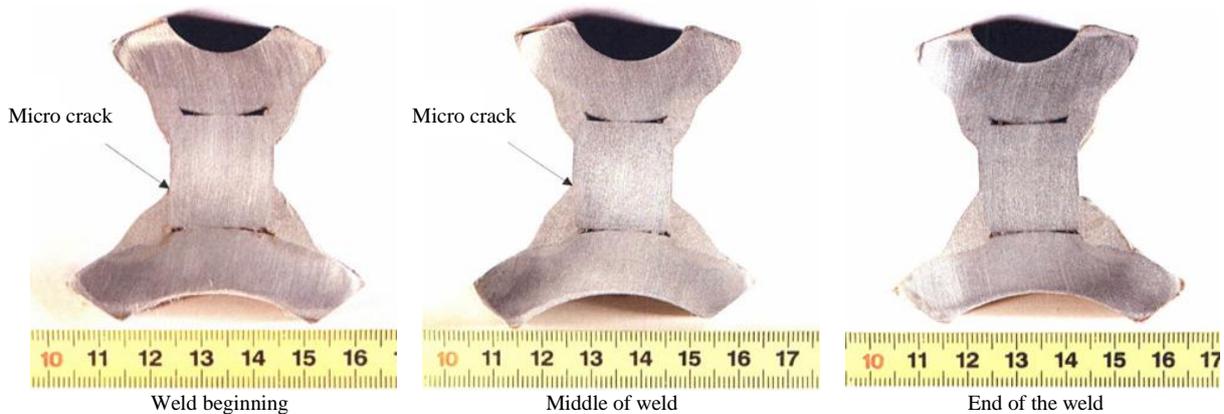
Cross-sectional surfaces of the sample “Weld 6”
